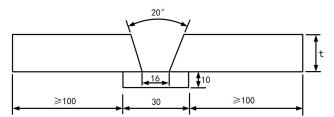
Edge preparation and size of deposited metal test assembly
